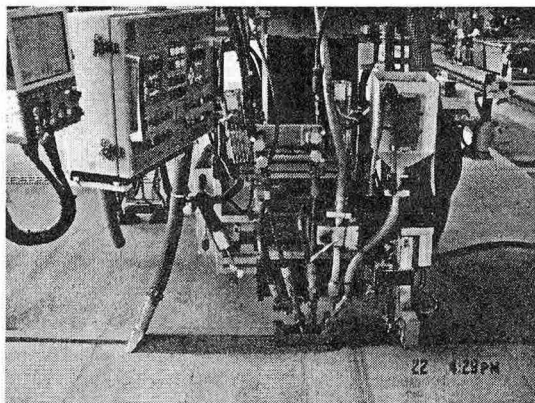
The actual welding machine applied a electromagnetic sensor system
